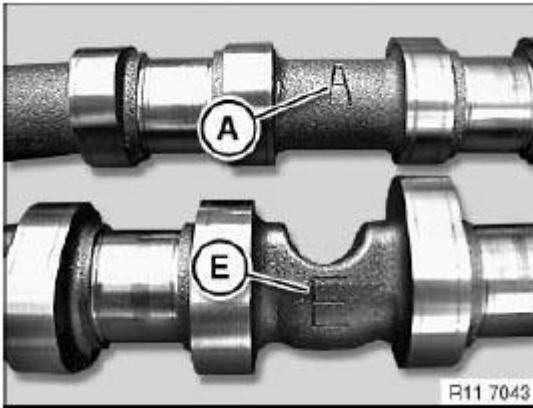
Identifying Exhaust And Intake Camshaft Identification Marks
